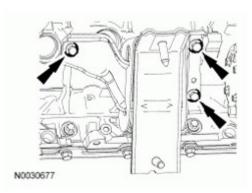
Locating Cylinder Block Drain Plugs Courtesy of FORD MOTOR CO.
